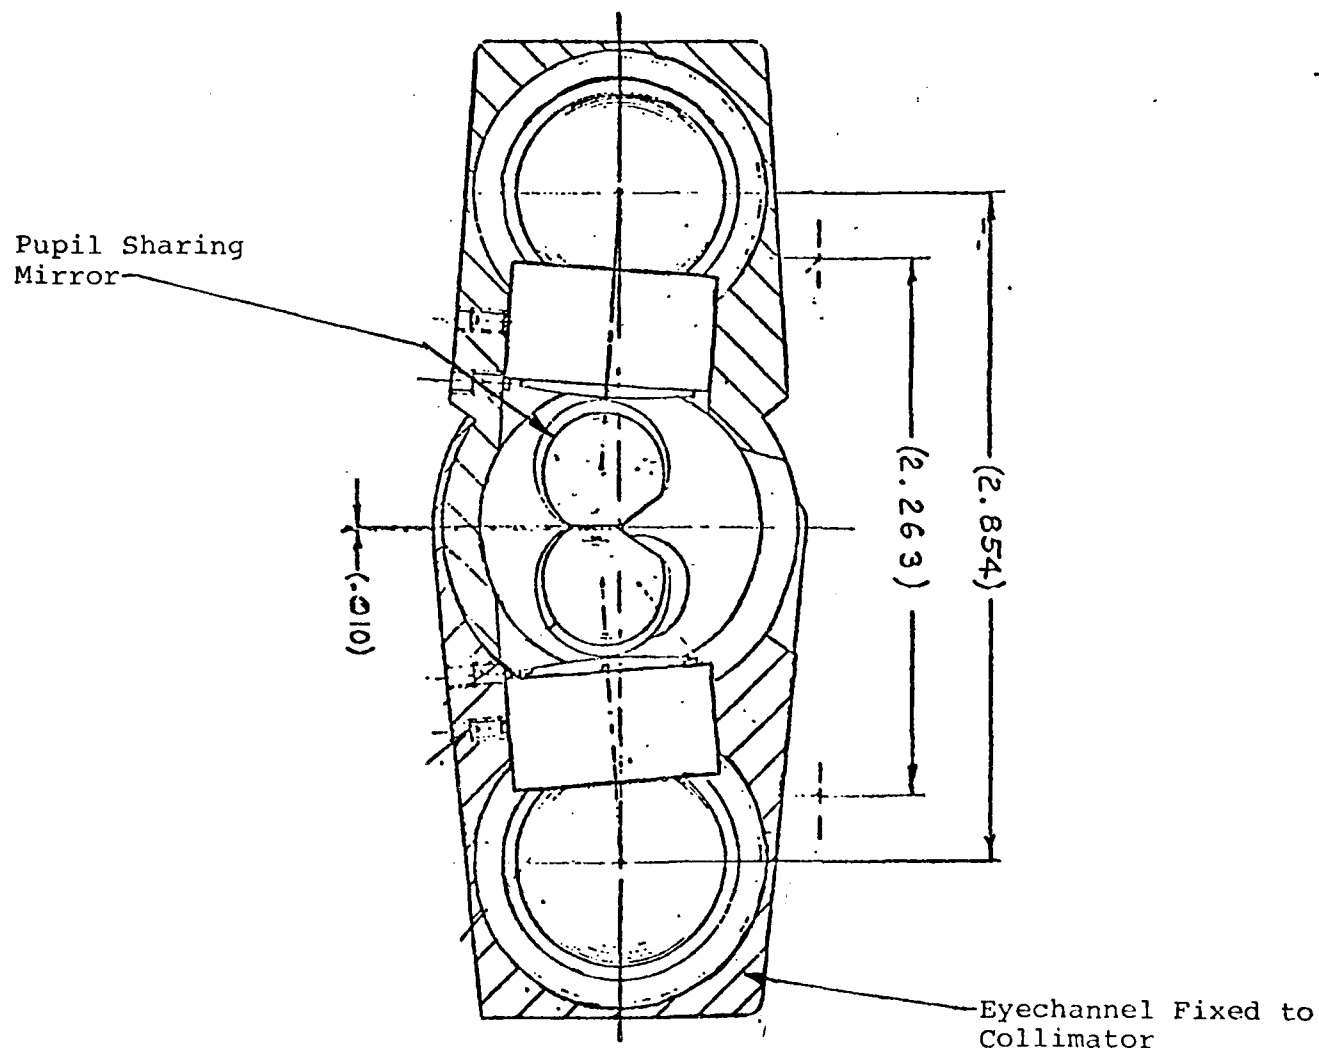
Section View of Eyechannel - 18mm and 25mm Wide
